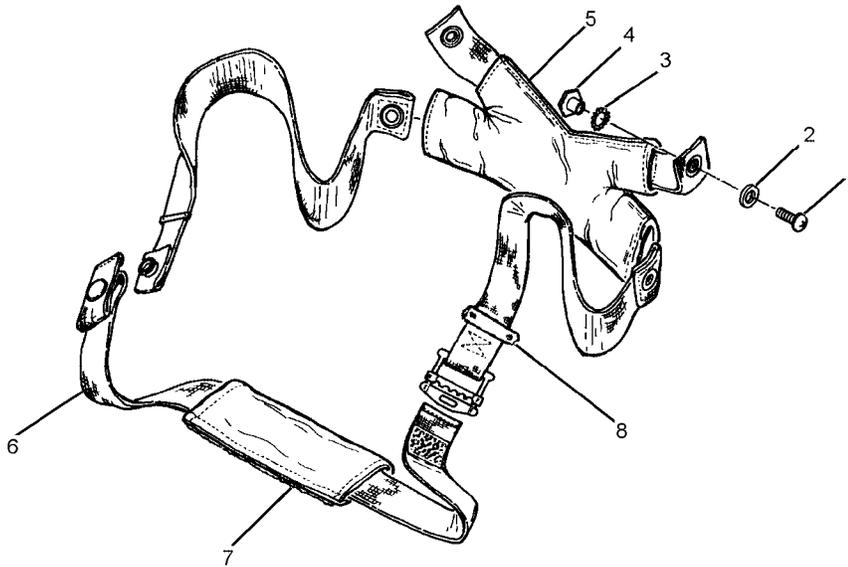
PRU-53/P Chin/Nape Strap Assembly
